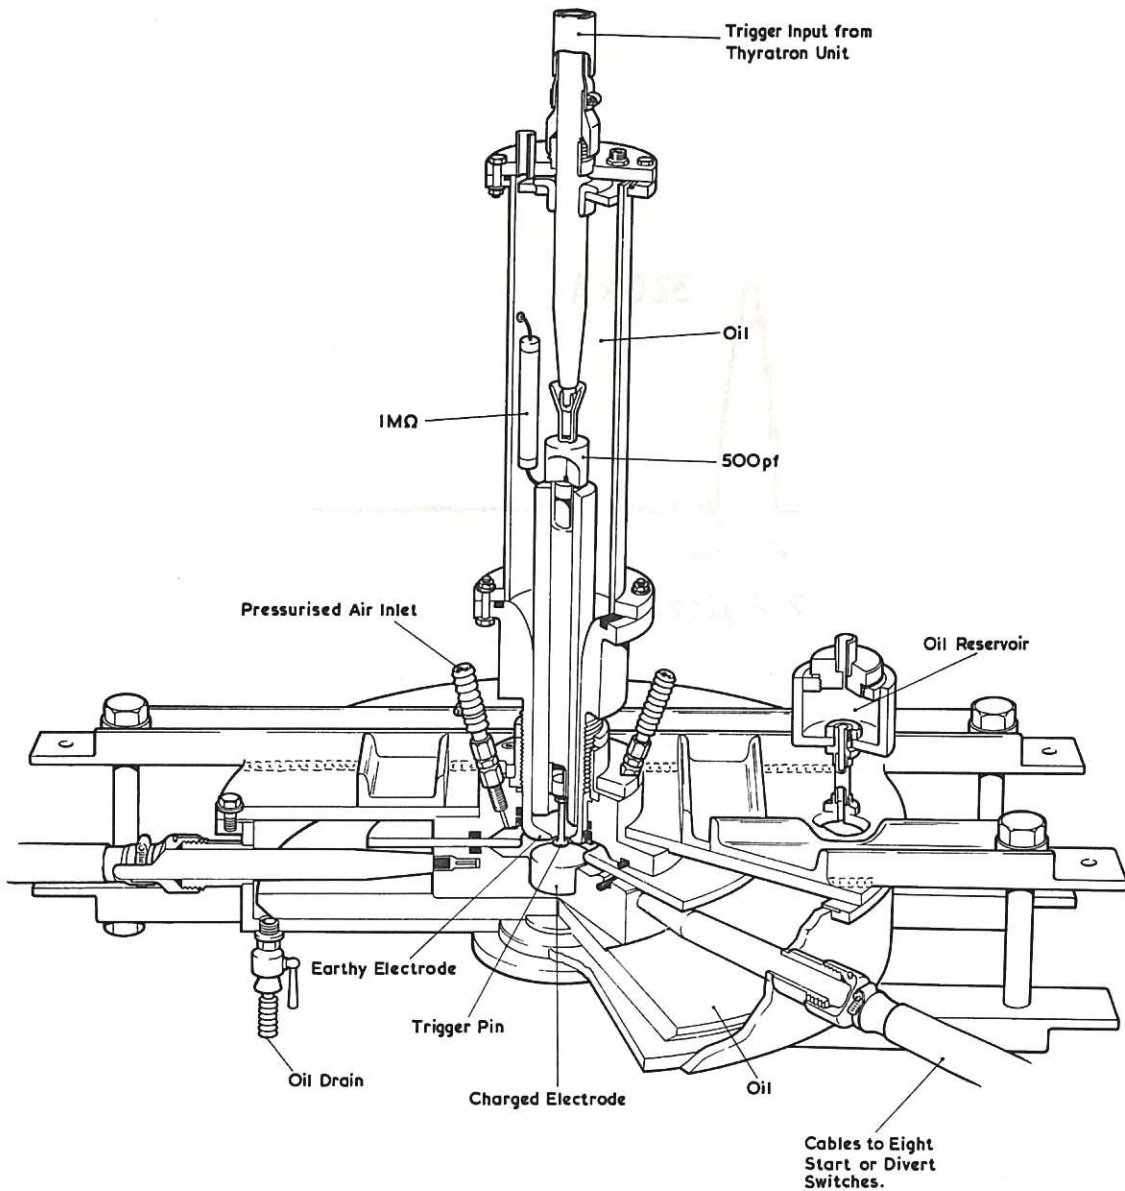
Sectional view of start master and divert master switches (CLM-P 123)
